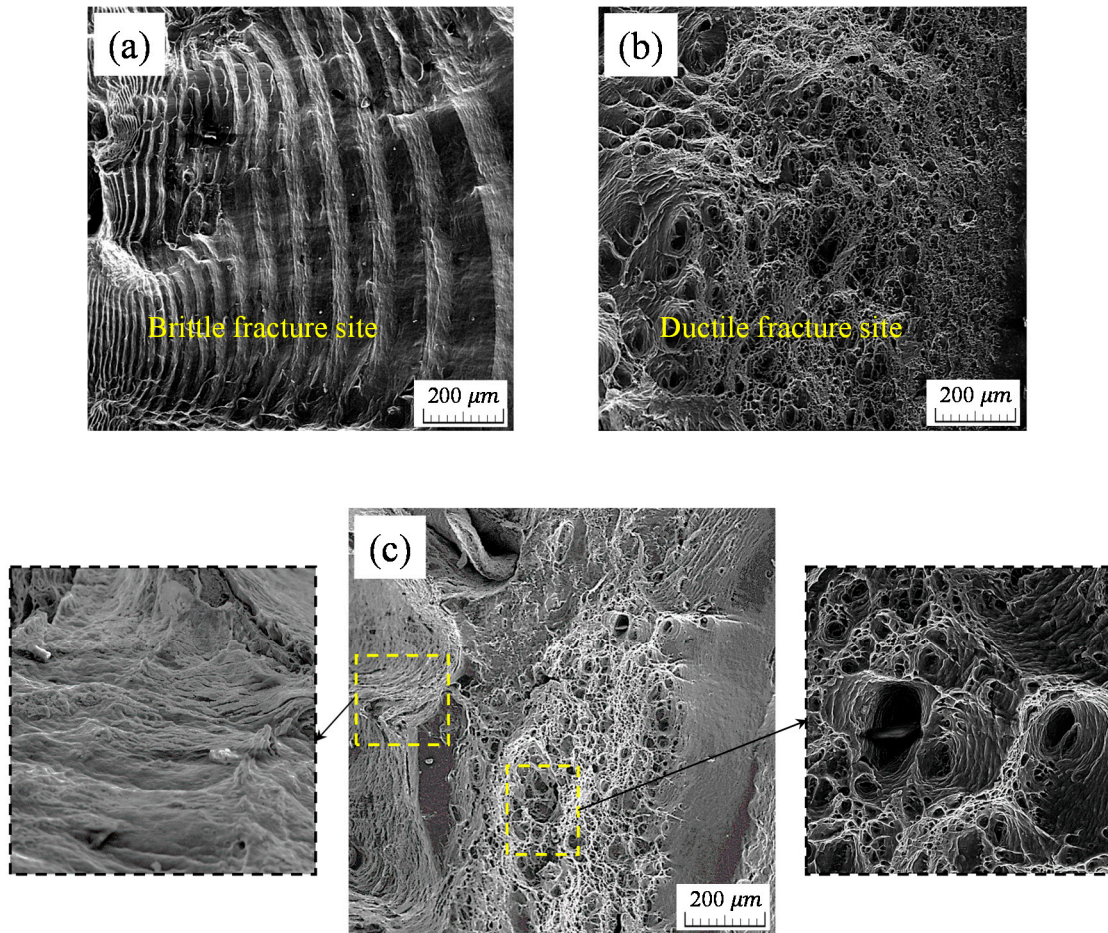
SEM images of fracture surface: (a) as-welded Al 1060-H16 FSW sample; (b) FSW sample with 100 μm-thick copper foil in the SZ; (c) FSW sample with 200 μm-thick copper foil in the SZ.
